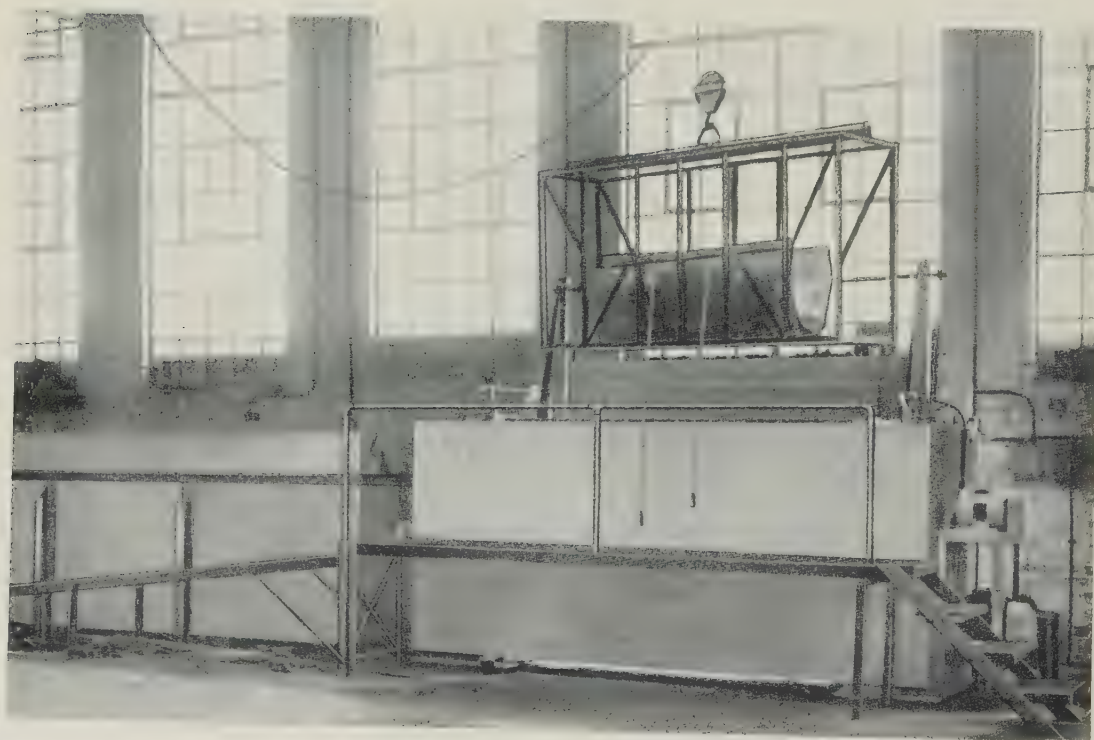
Continuous Light-Alloy Billet-Heating Furnace, Equipped with Chain Conveyors.
